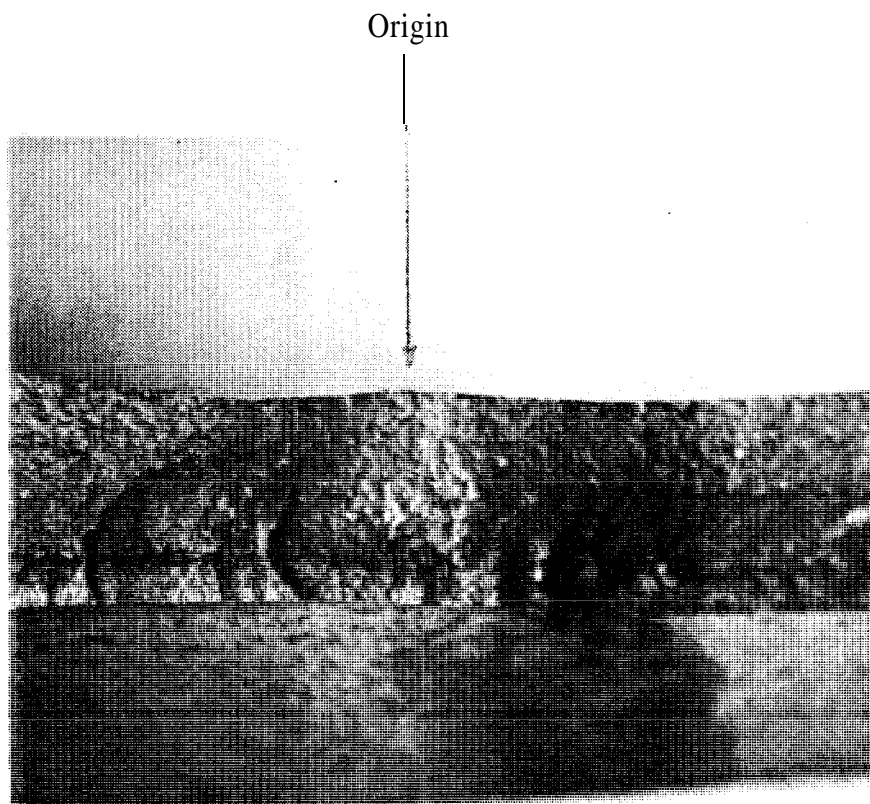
Photo montage showing fracture faces B and D. Arrow indicates fracture origin, as highlighted by chevron patterns and river markings. Mag. 2x.
